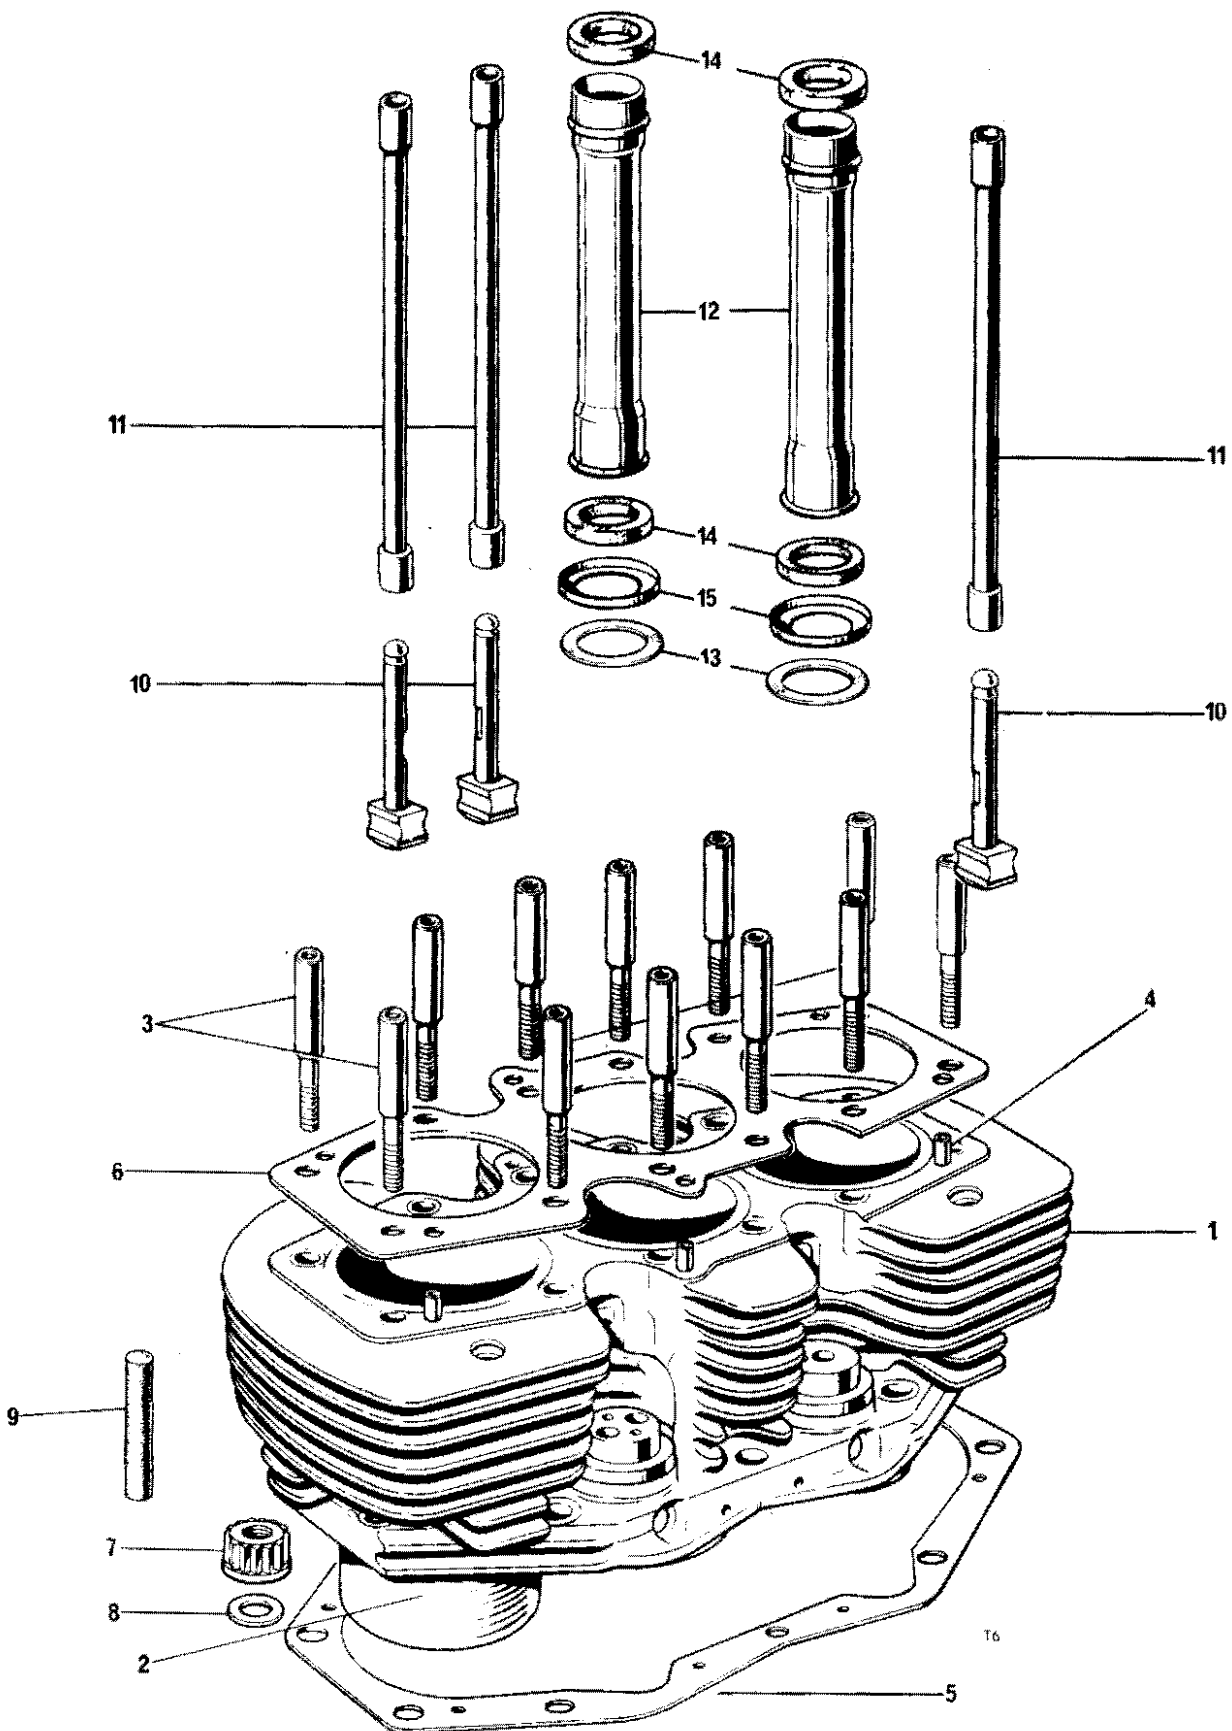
CYLINDER BLOCK, PUSH RODS, TAPPETS
